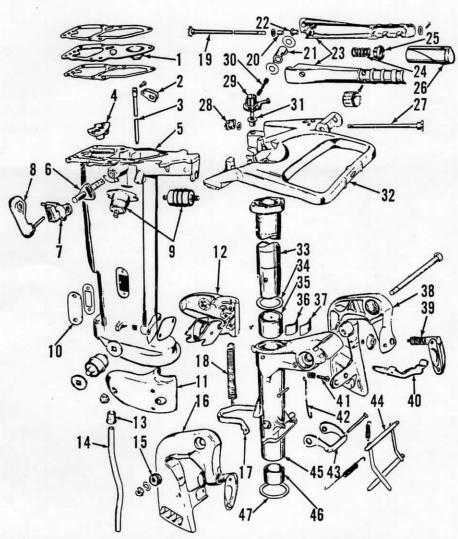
Exploded view of stern bracket, exhaust housing, drive shaft housing and associated parts used on 1959 production 12 horsepower models. Other models are similar,
